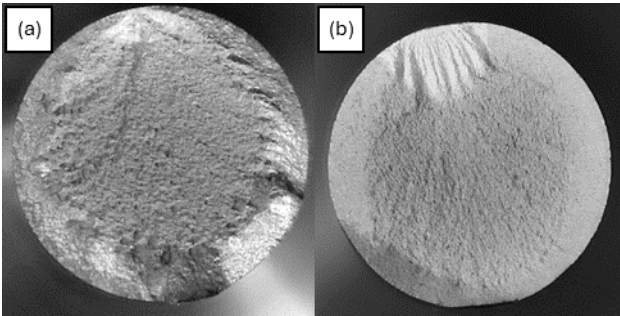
R=0.5 forged plate 2009/SiC/15p axial fatigue fracture surfaces for coupons failing at (a) 2.2×10^4 cycles, and (b) 1.3×10^6 cycles.
